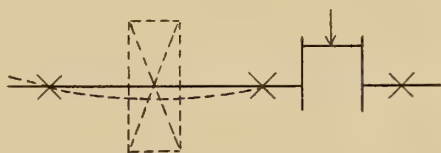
BENDING OF A CRANKSHAFT AS USUALLY DESIGNED
